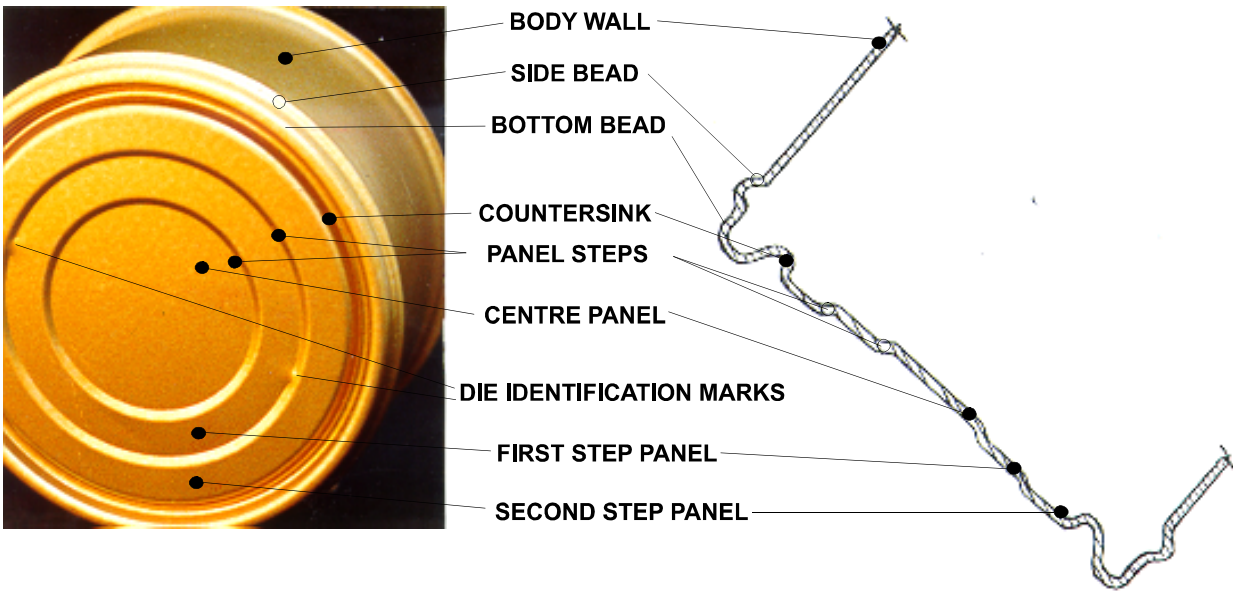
a - Two Piece Can - Integral End with Countersink
